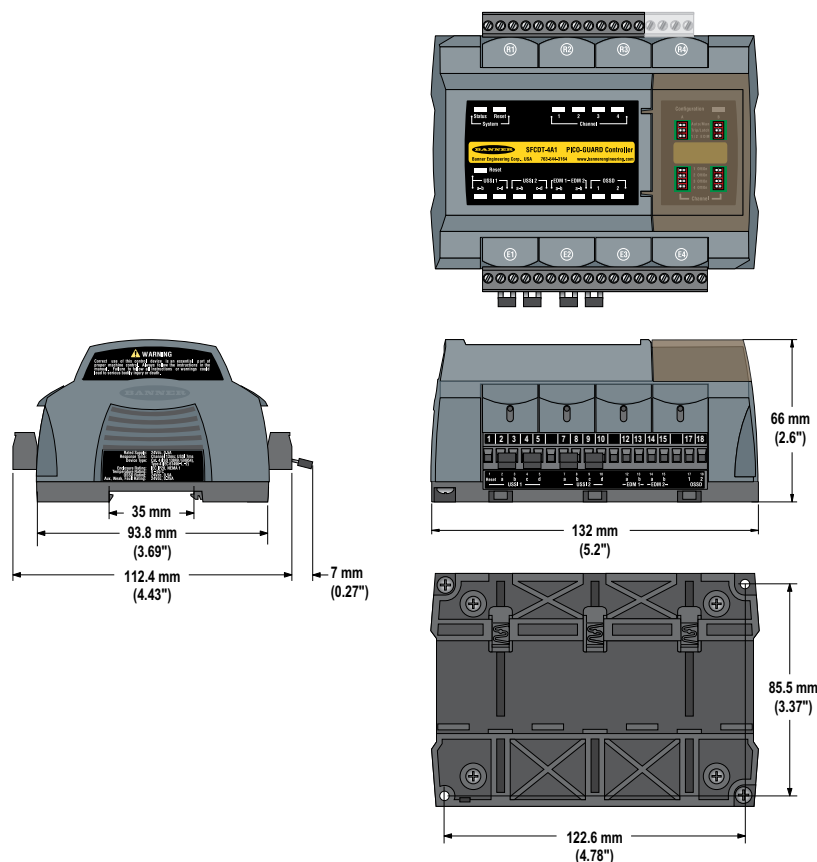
Model SFCDT-4A1.. controller dimensions
